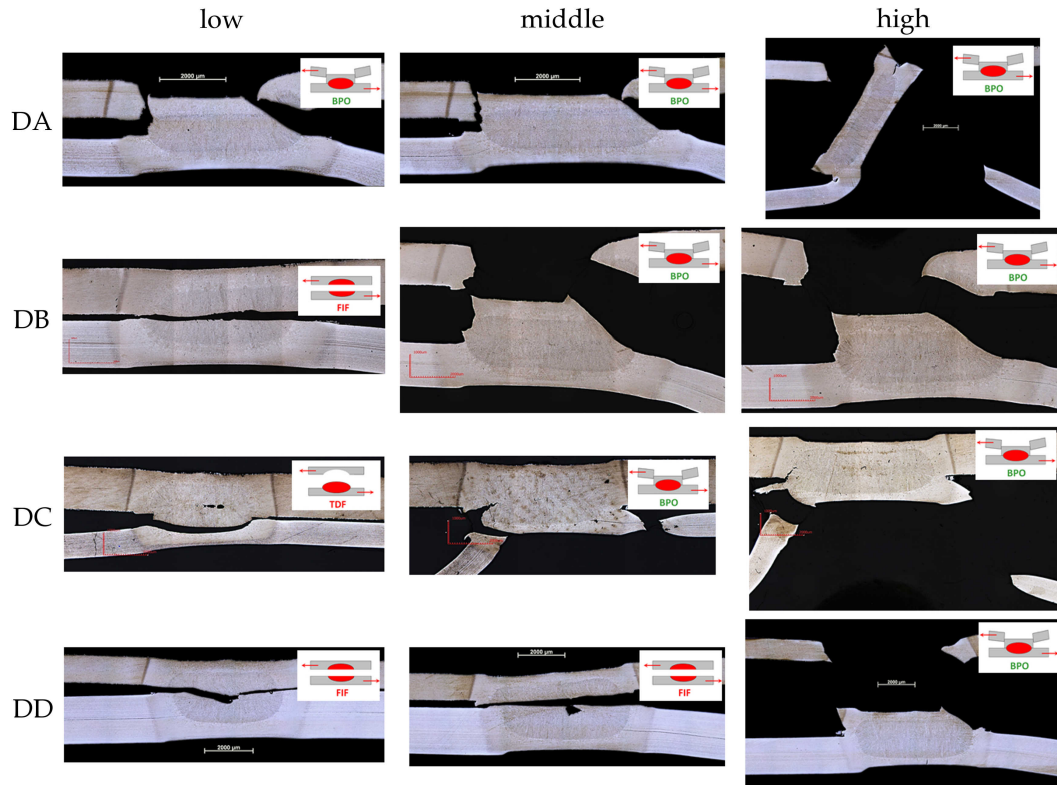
Spot weld tensile shear failure modes for the four configurations (DA, DB, DC and DD) and the three welding intensities.
